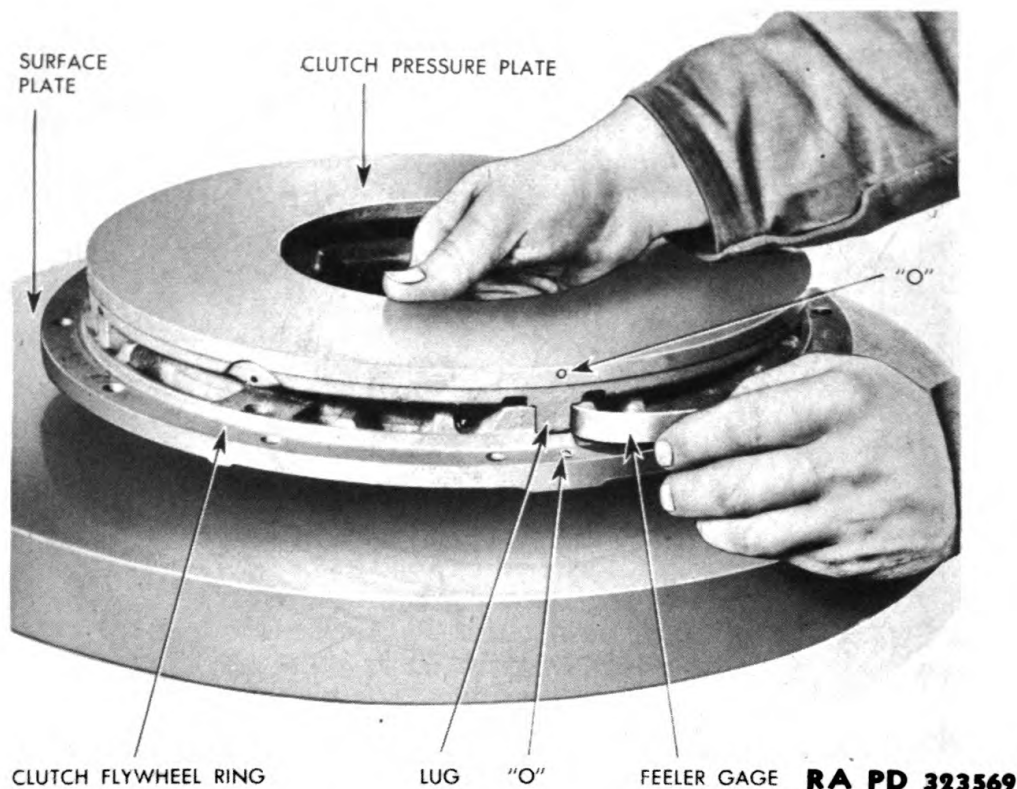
Checking Clutch Flywheel Ring and Pressure Plate for Wear
